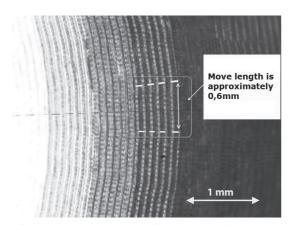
Part after toolpath 3 (enlarged 30-times)
